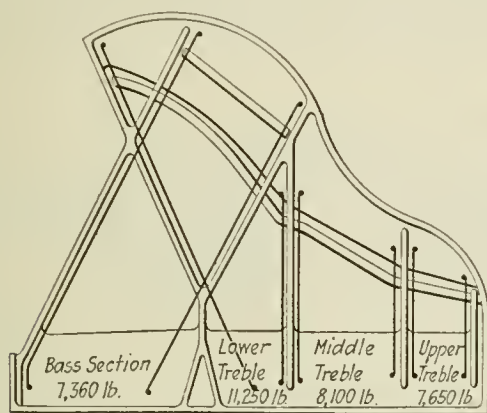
STRING PLAN AND IRON FRAME OF A GRAND PIANO
